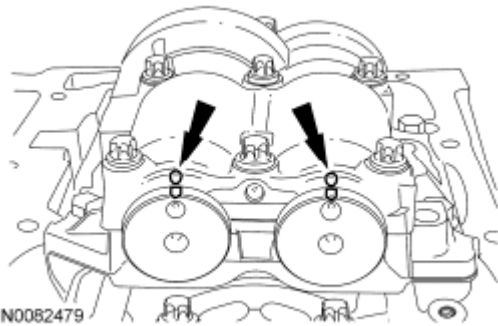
Locating Balancer Unit & Shafts Reference Mark
